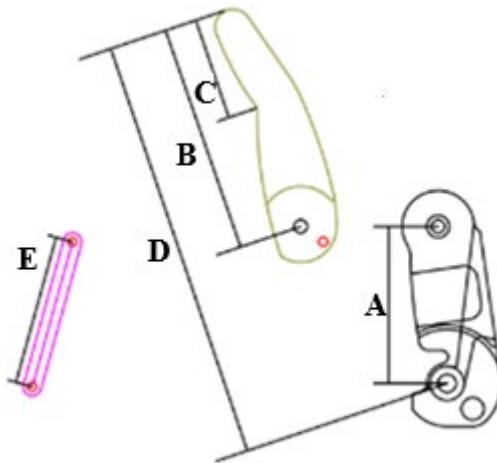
The cam design - shaft connecting mechanism for each finger, actuated from a specific motor through a linear actuator.
